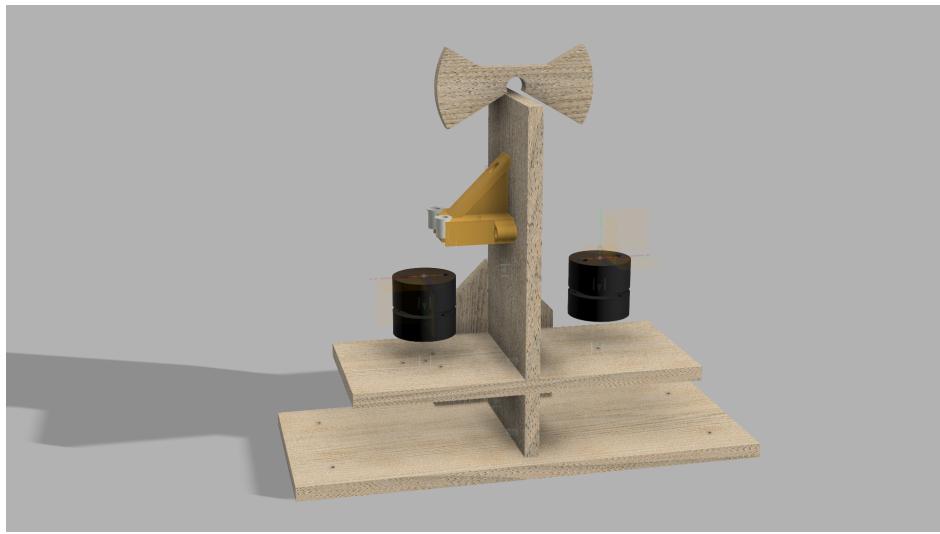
Preliminary CAD model. Includes all wooden components, the sleeve bearings, bearing mount, and coil housings.
